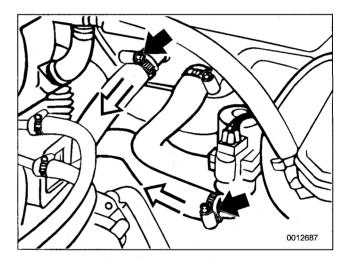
Disconnect heater hoses at heater valve (A) and heater core (B).
